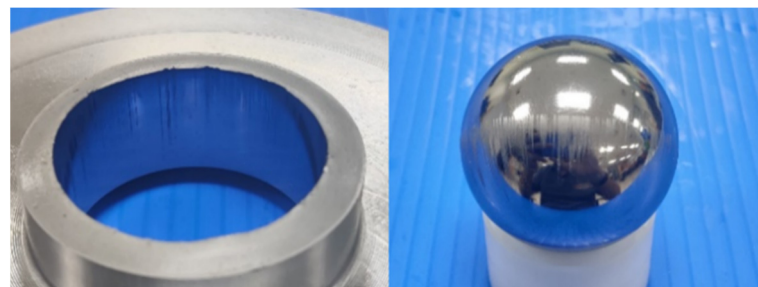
Surface defect "wear" on specimen and tool.
